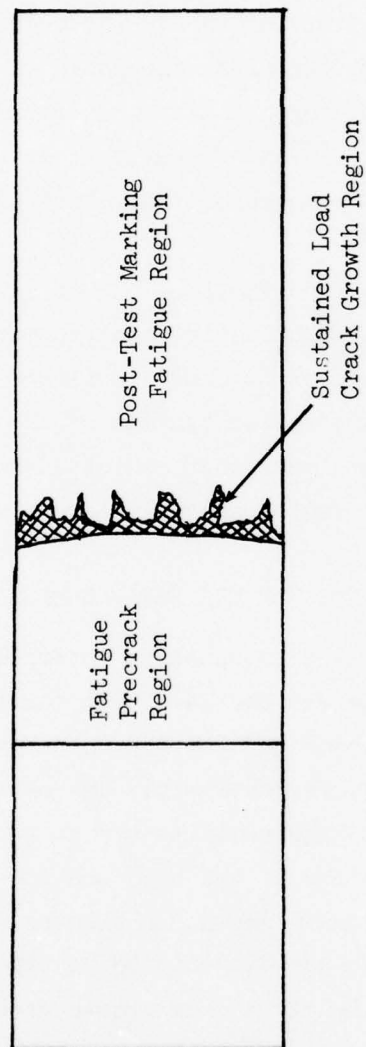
Schematic of Post-Test Fracture Surface of 1.4 inch thick RA Materials Tested in 3-1/2% NaCl Solution
